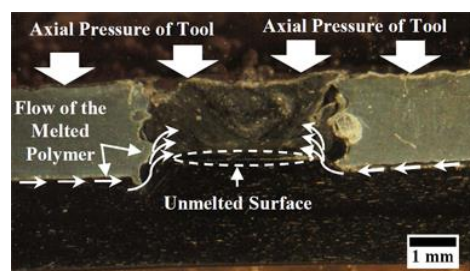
The way of filling the threaded hole by melted polymer and remaining the unmelted surface at center of the hole base
